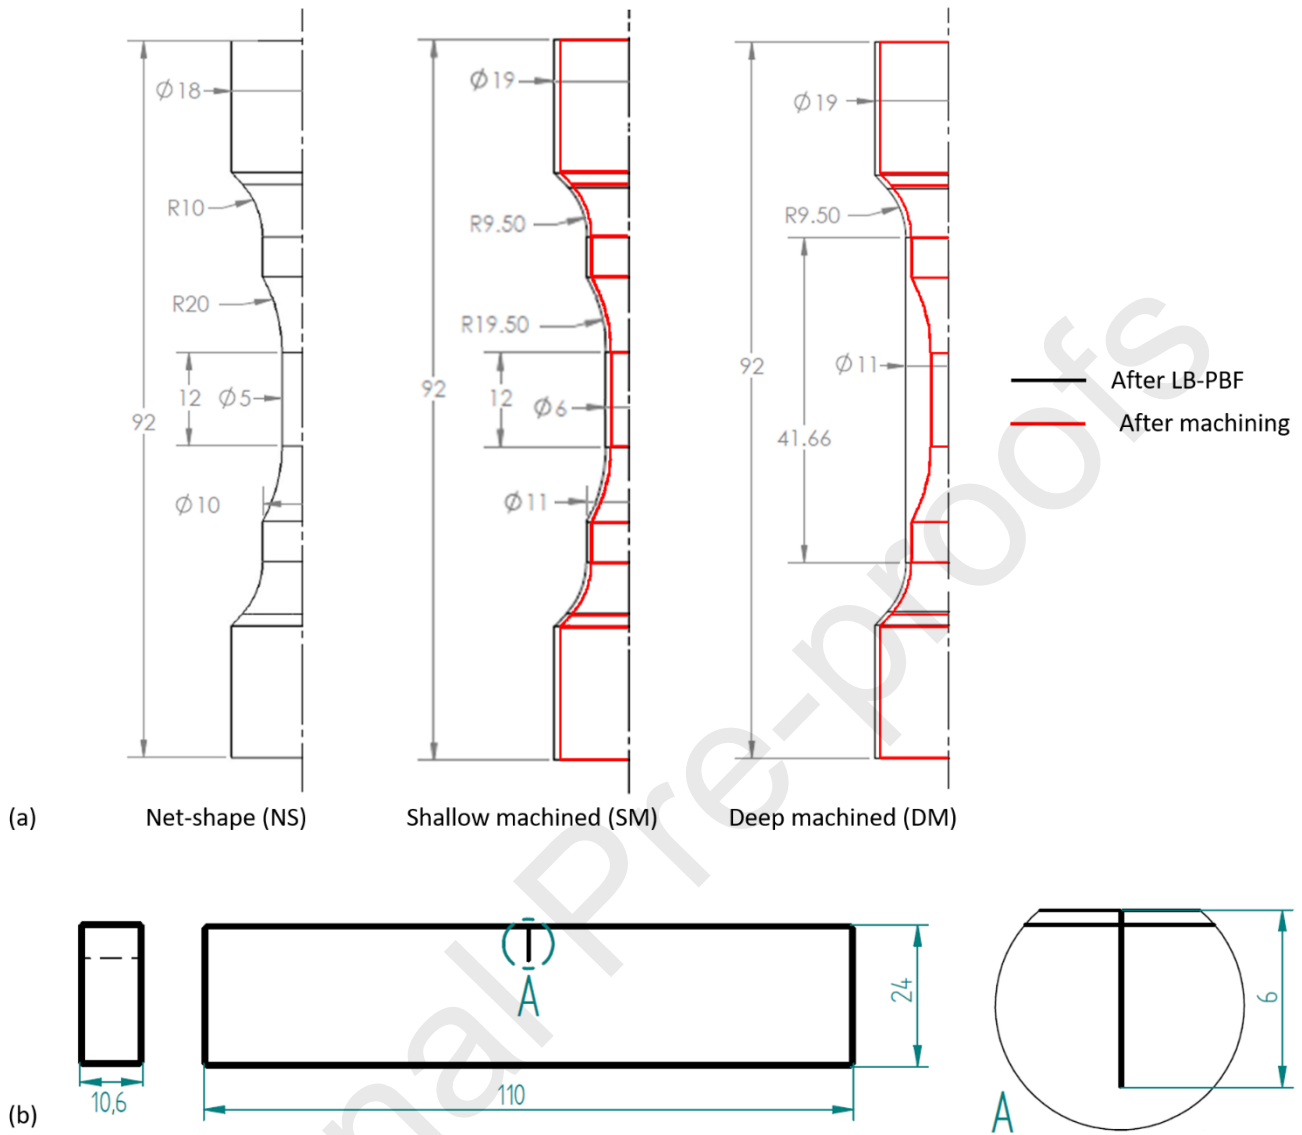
Drawing of specimens: (a) uniaxial fatigue according to ASTM E466 [39], geometries before machining (in black) and after machining (in red); (b) single-edge bending (SE(B)) FCG after machining according to BS ISO 12108 [40].
